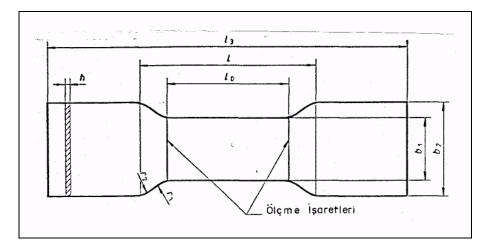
Tensile Loading Test Specimen (EN ISO 527-3)
